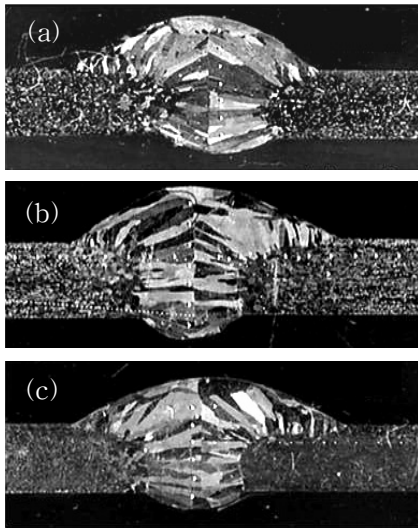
Bead shape and their enlarged grain boundaries of (a) STS 429L (b) STS 444 (c) dissimilar
